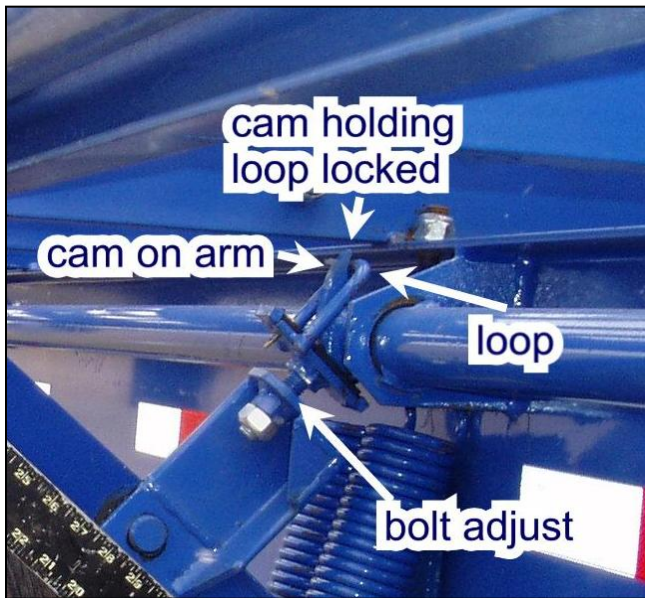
ADJUSTING THE OVER CENTER DISTANCE
